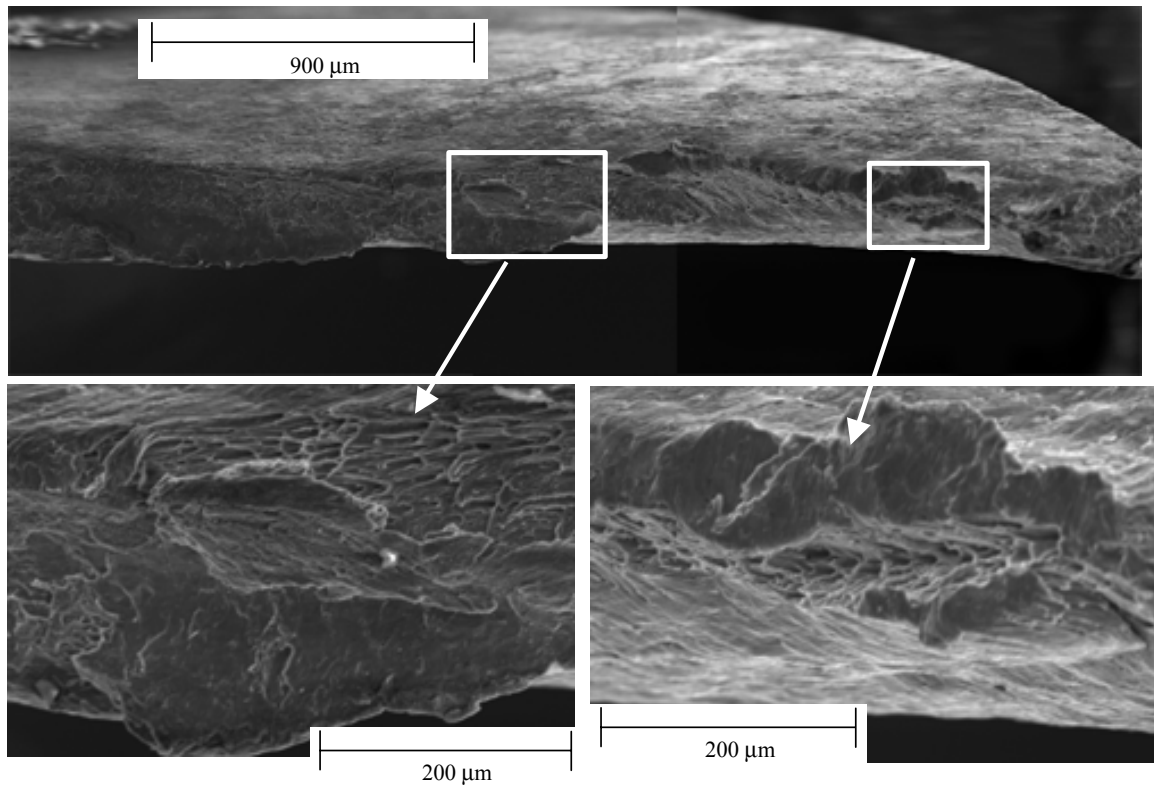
Fracture surface an AA6111 quasi-static tensile sample.
